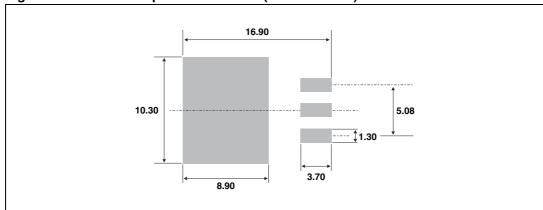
D<sup>2</sup>PAK footprint dimensions (in millimeters)
